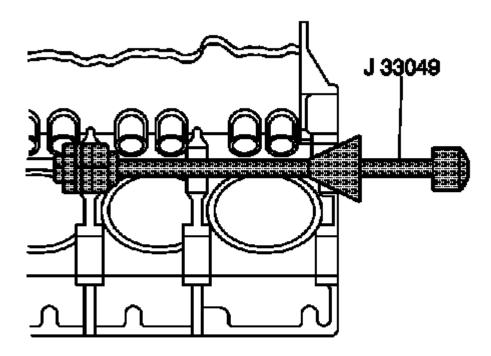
Removing/Installation Camshaft Inner Bearing Using J 33049 Courtesy of GENERAL MOTORS CORP.
